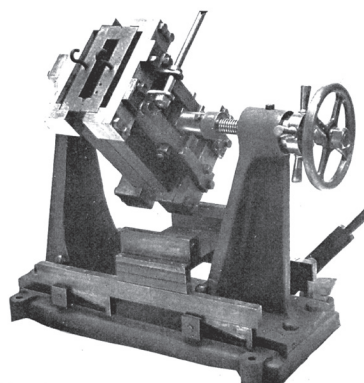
Principle Diagram of Tilt Casting Machine and Mold Shape¹⁵
